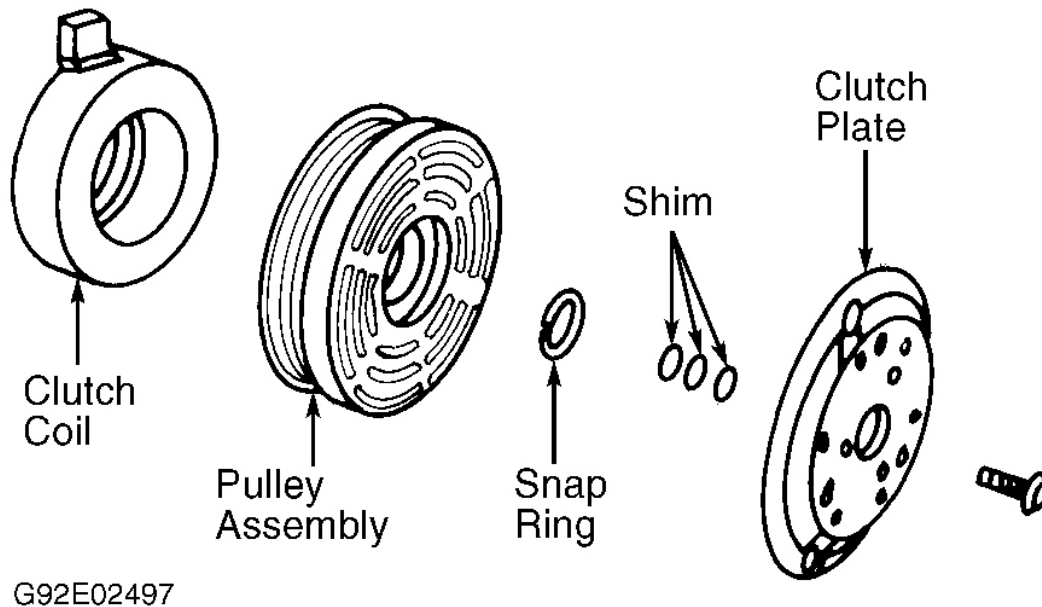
Exploded View Of Compressor Clutch (Ford FS-10 Shown; Halla FX-15 Is Similar)
